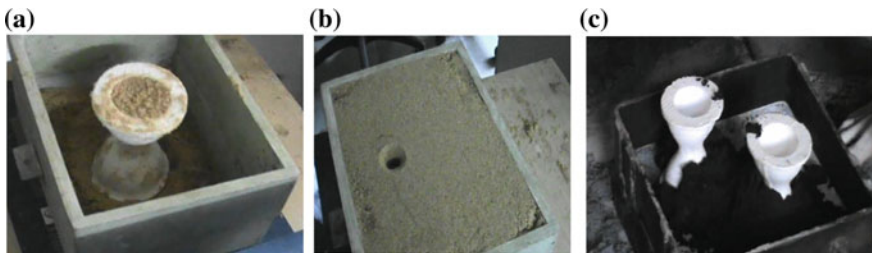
a Beginning of no-bake sand mold preparation, b no-bake sand mold after curing, c green-sand mold making for EPC process
